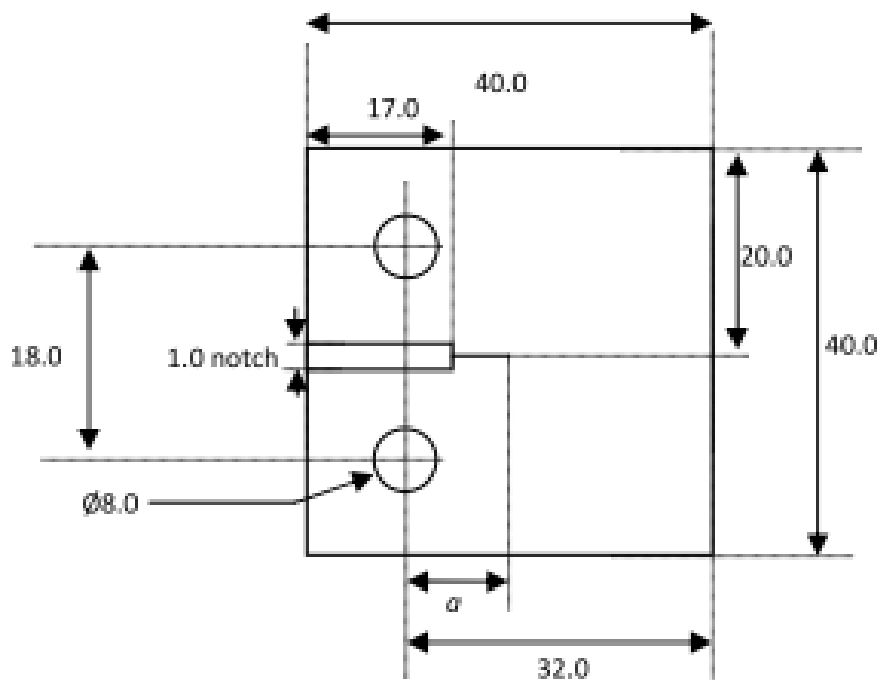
Fracture toughness test specimen dimensions according to [166] (units are in mm)
